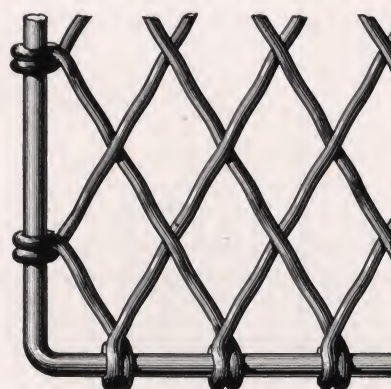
Detailed Construction of Wire Window Guard with Round Frame
